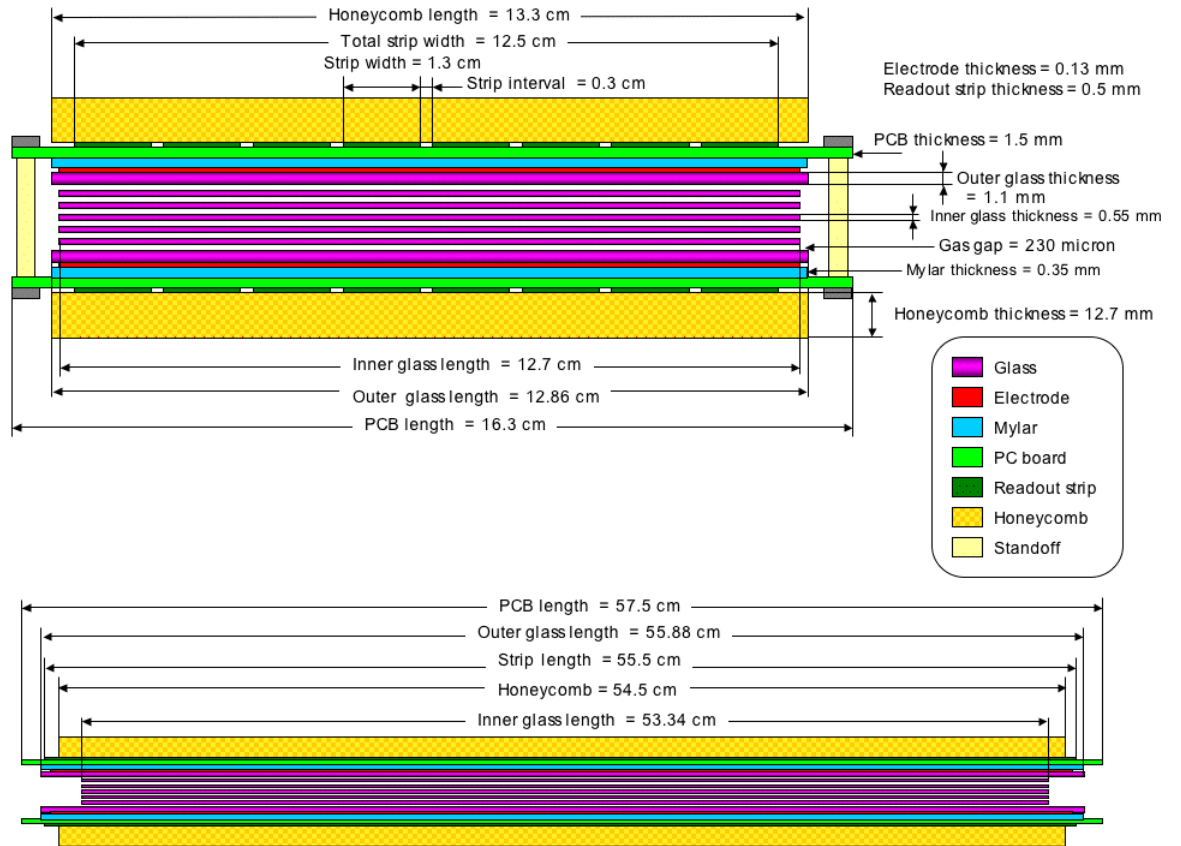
Cross sectional view showing all component sizes for the PH2 design.
